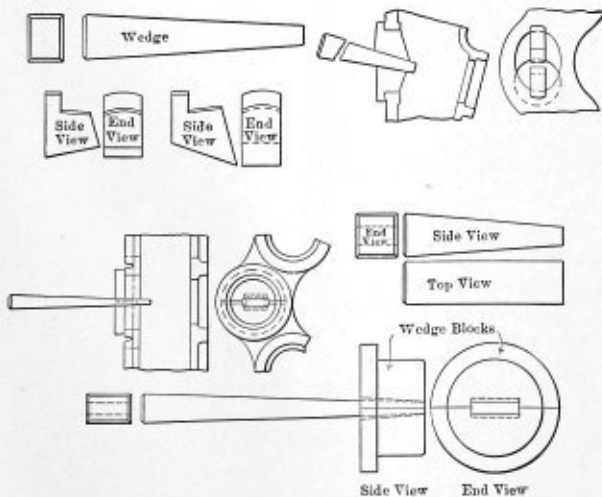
Showing Wedge Blocks and Manner of Bursting Cast Iron Headers
